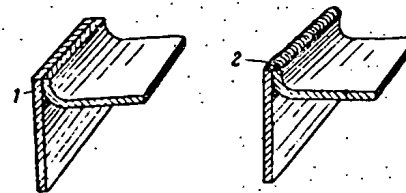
Flanged joint (1) and welded seam (2)
